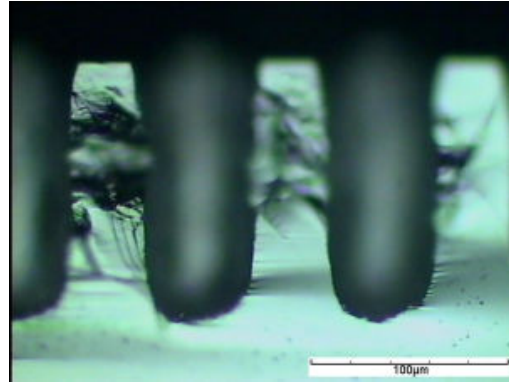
cross section of holes drilled in a Si wafer. The hole-to-hole depth uniformity is excellent.
